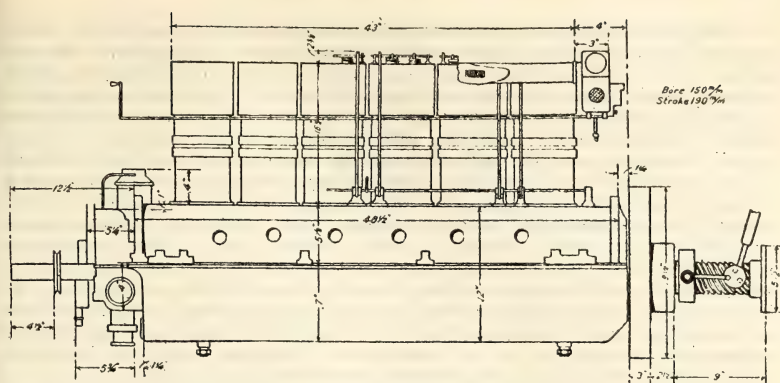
Leading Dimensions of Maybach Engine from German Airship *S. L. 11*.
